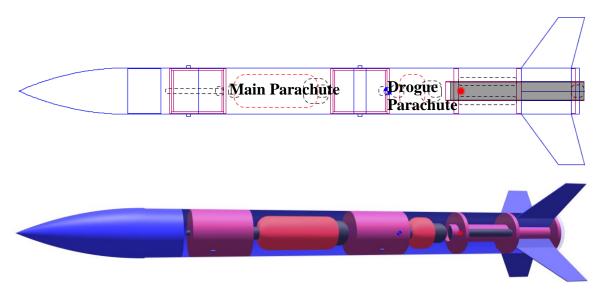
Full Rocket Assembly with Side Cross-Sectional View and 3D Model
